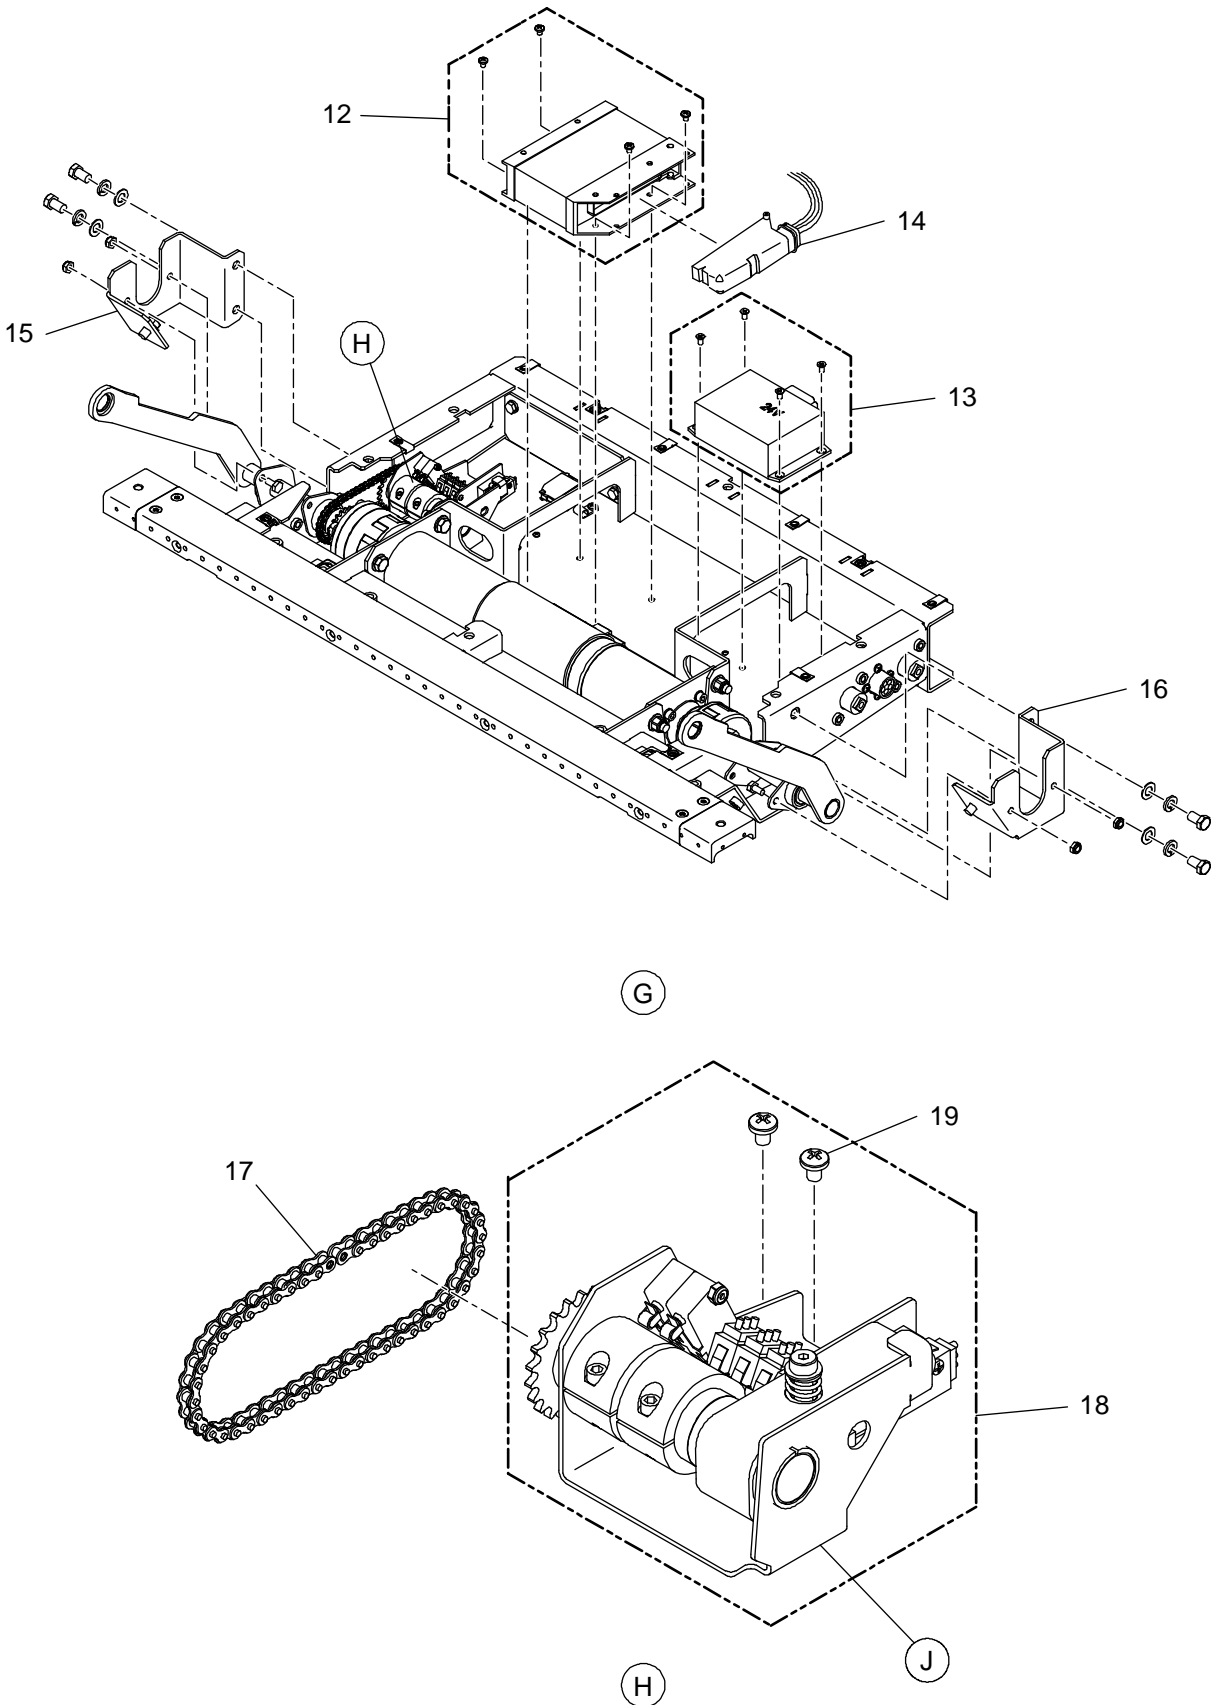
FR2E-SERIES RAMP ASSEMBLY (SHEET 4 OF 5)
